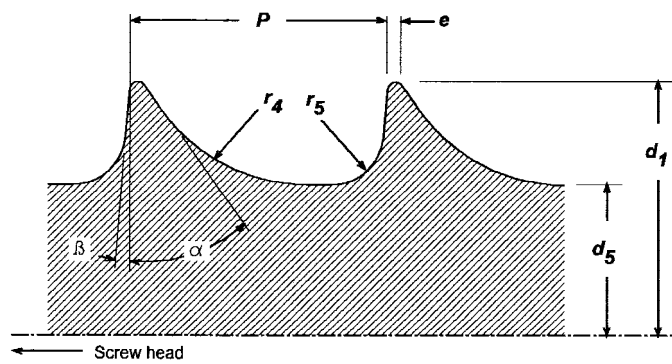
Schematic of HA Screw Thread Dimensions (Table A4.2)
